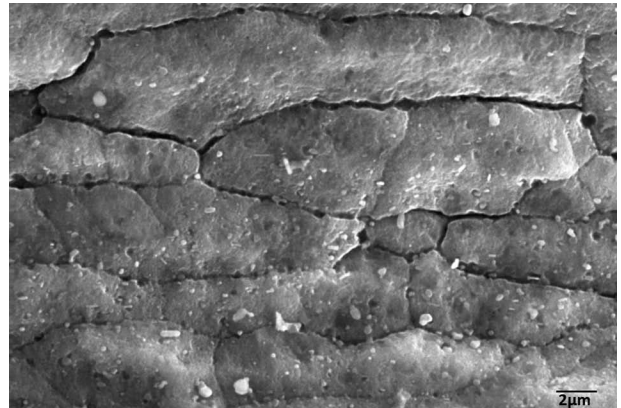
High magnified image of fracture surface shown in Fig. 217
